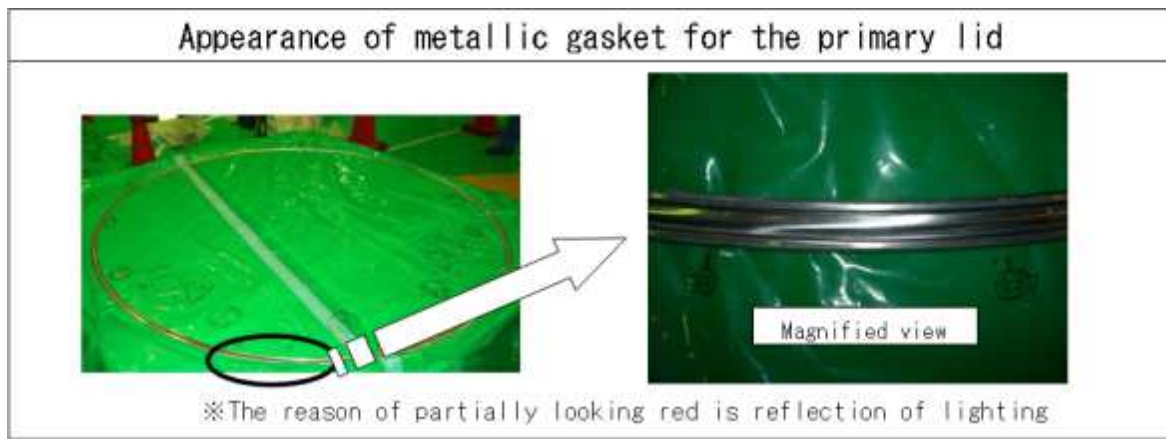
Visual inspection of metallic gasket for the primary.
